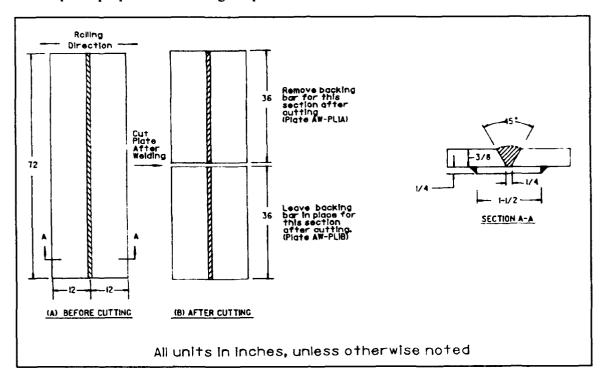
Air Welded Fatigue Test Plate AW-PL1
